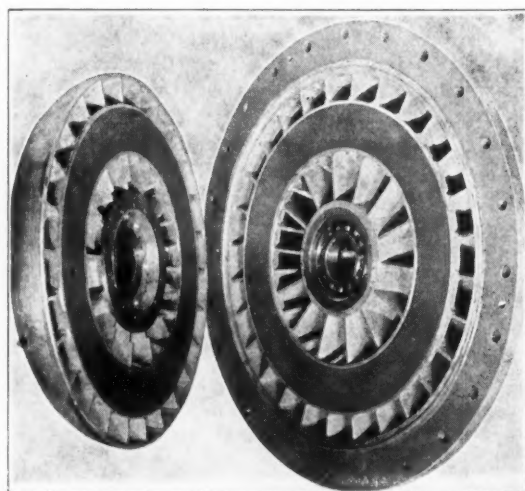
The runner and impeller which go to make up the main rotating parts of a hydraulic coupling.
